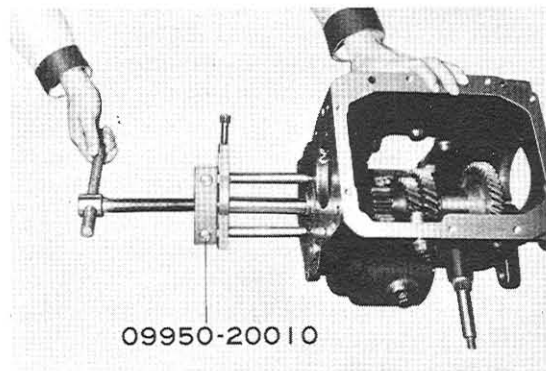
Removing Counter V5070 Shaft Rear Bearing
